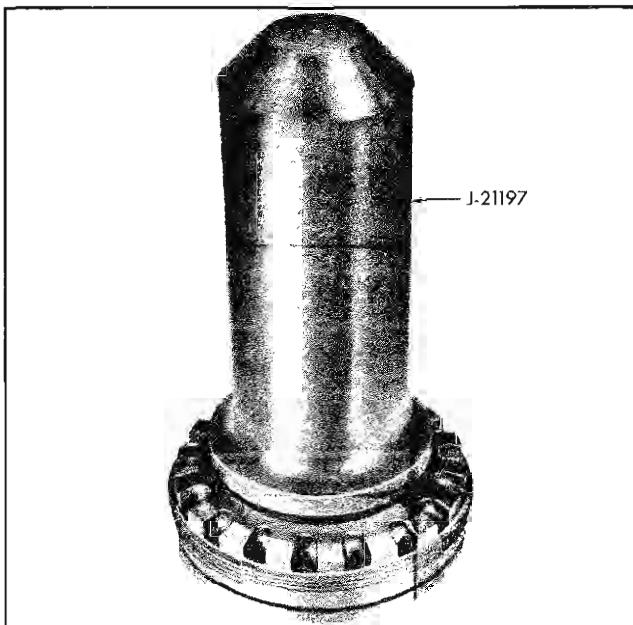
Tool Positioned to Install Front Oil Seal
